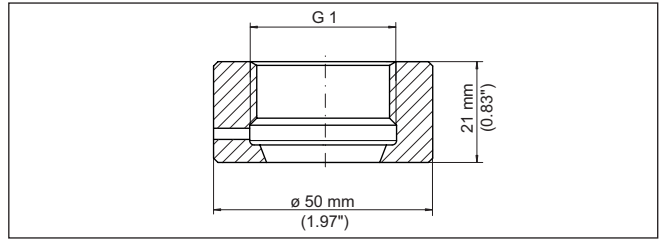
Dimensions direct welded socket G1 (ISO 228-1) - Cone seal
